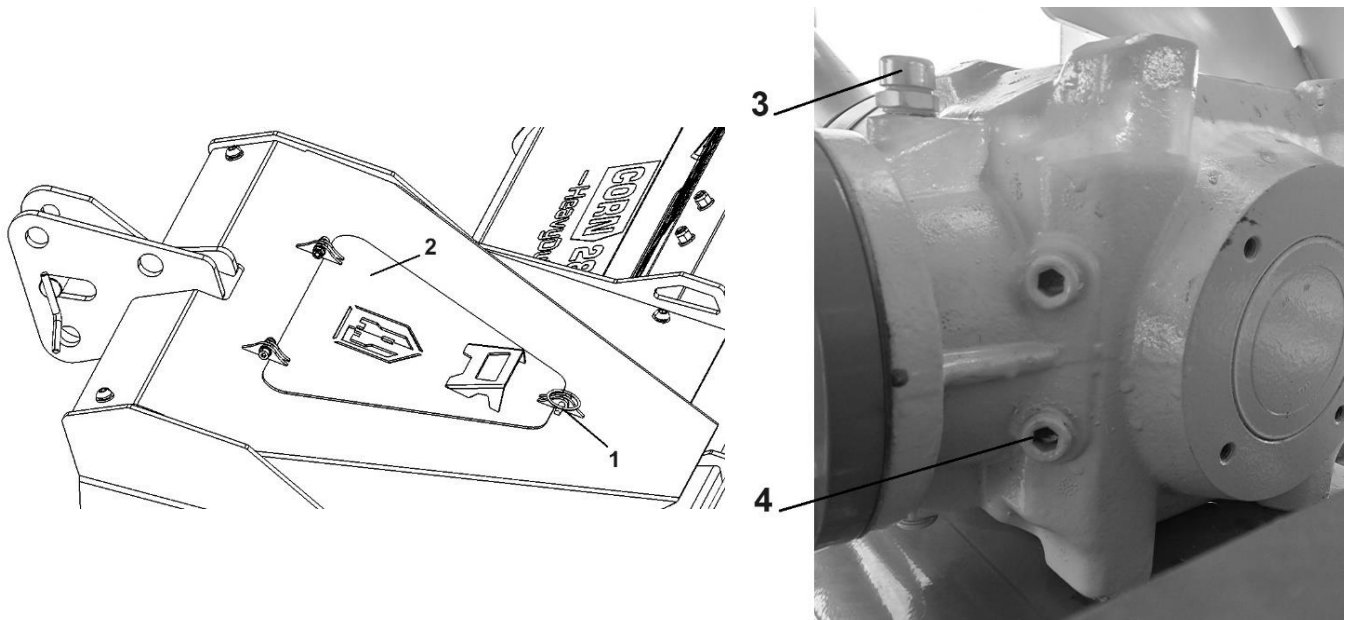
Changing the oil in the angular gearbox: 1 – locking pin with spring ring, 2 – upper frame guard, 3 – oil filler plug with breather, 4 – inspection plug
